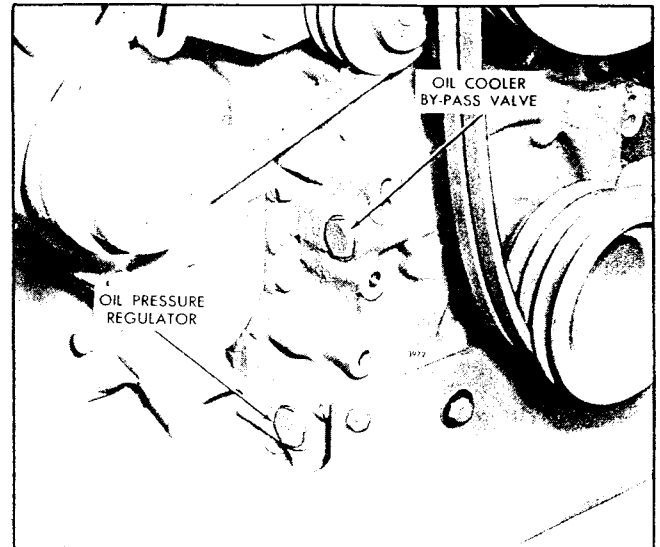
Location of Former Oil Pressure Regulator Valve -- 6V Engine Shown
